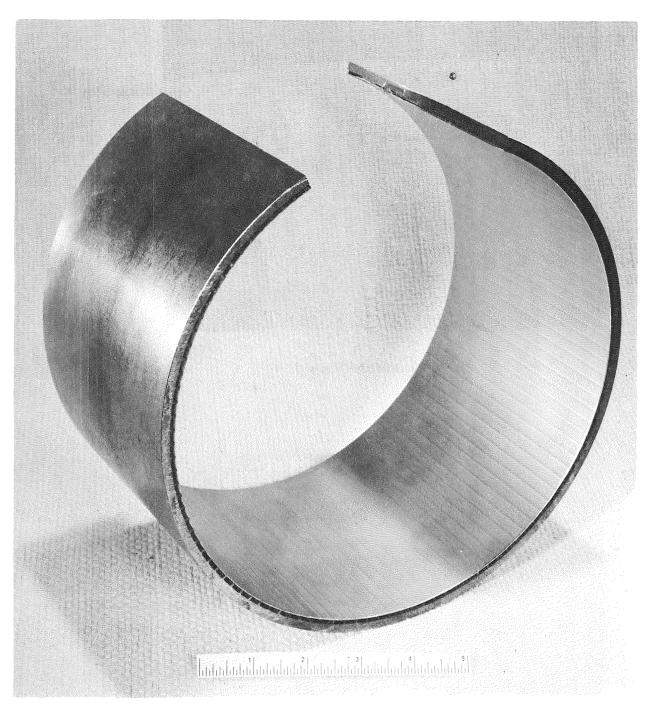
EXPLOSIVELY WELDED INTERFACE BETWEEN LINER AND RIB IN CYLINDRICAL SPECIMEN
